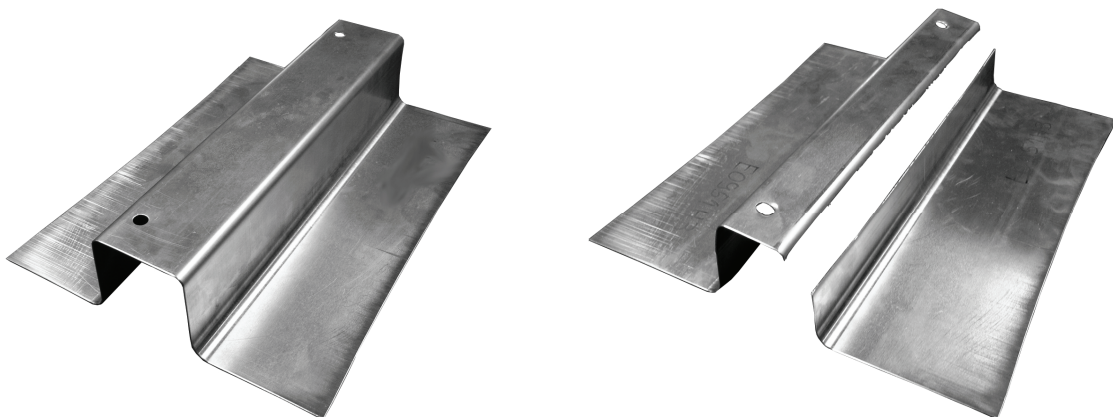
Experimental part without rupture (left) and failed part (right) (AA 5182-O, initial blank holder force 300kN).
